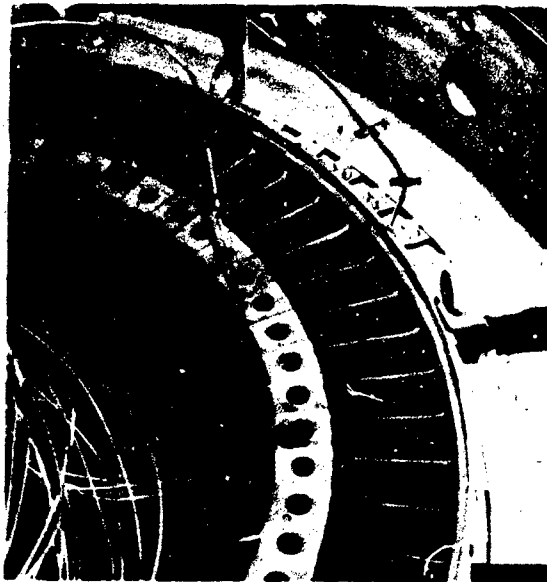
Build IV Showing Leading Edge of The First Nozzle Vane Assembly. Nozzle Vanes Have Section Wall Trip Wires Installed (XPN-23438)
